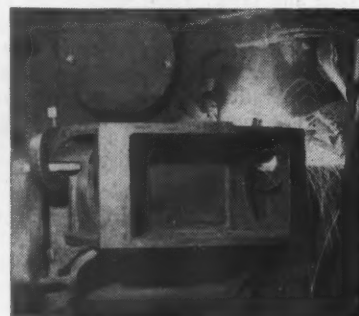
Railroad Back Shop replaces buffer casting by welding replacement unit to locomotive frame with Lincoln "Shield-Arc 85."
